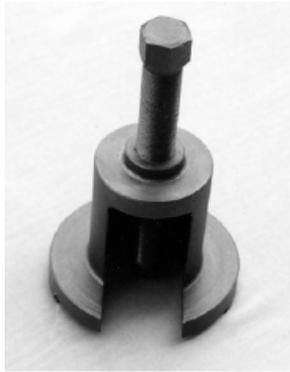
Bearing Extractor of Countershaft of Secondary Transmission
